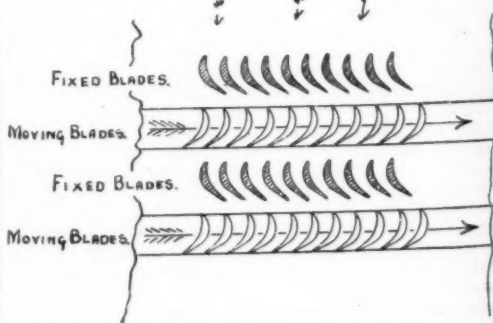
Section through blades in annular space between shaft and casing showing relative positions of fixed guide blades and moving blades. The three arrows at the top indicate the direction of motion of the entering steam.
